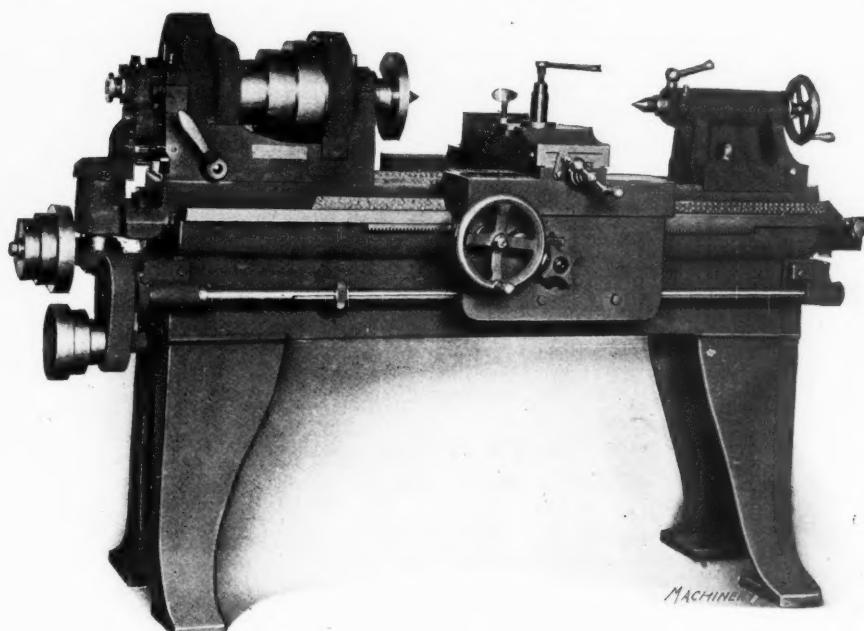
Front View of Whitcomb-Blaisdell Taper Turning Lathe
